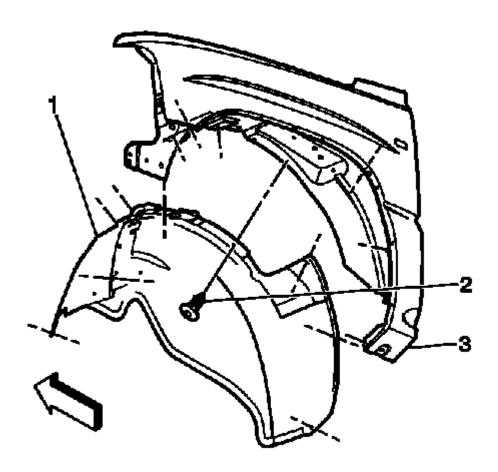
View Of Wheelhouse Panel & Push-In Retainers Courtesy of GENERAL MOTORS CORP.
